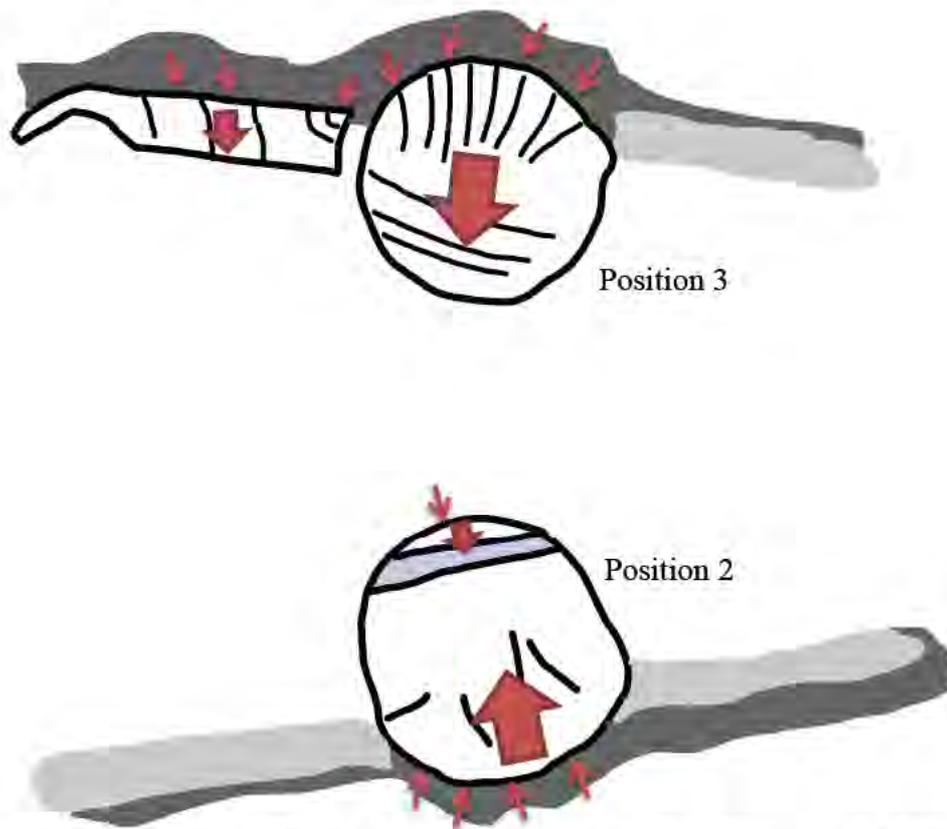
Schematic of Rod 2 & 3 fractures. Small red arrows highlight the multiple initiation points at the weld/rod interface. The large red arrow identify the general direction of fatigue crack growth. Overload area is shown in blue.
